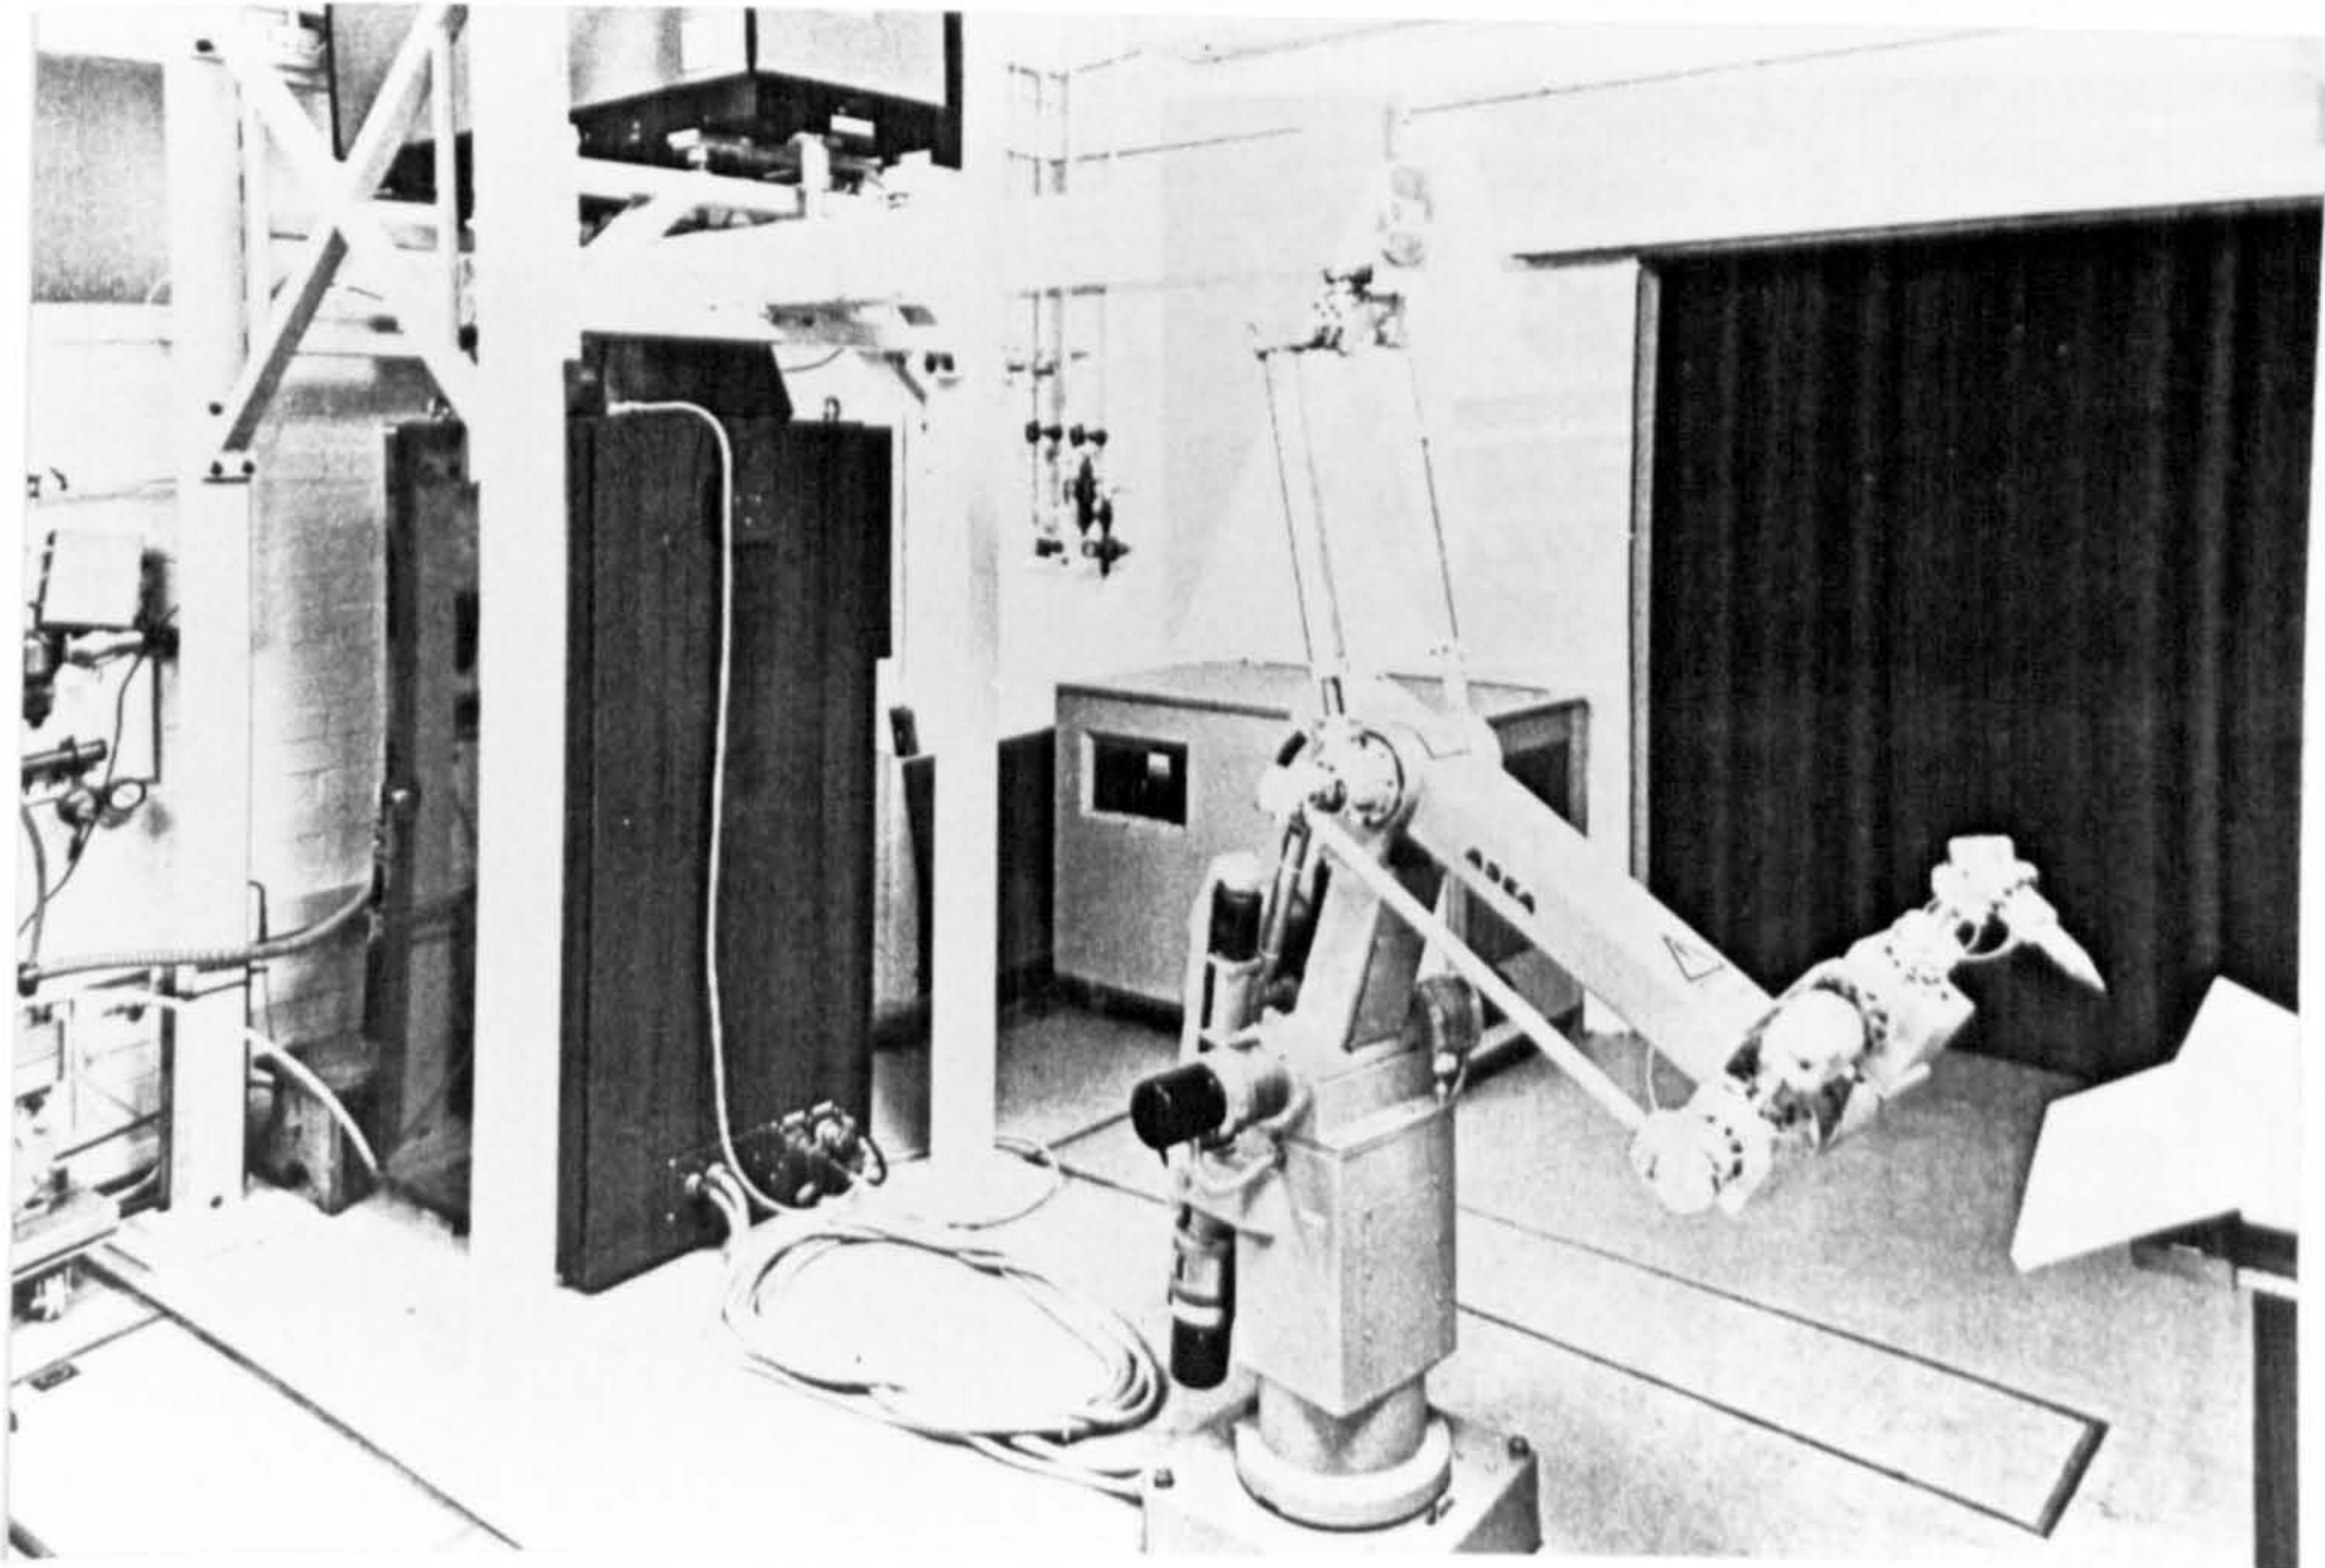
Laser based articulating robot, the beam guide forms an integral part of the robot arm
